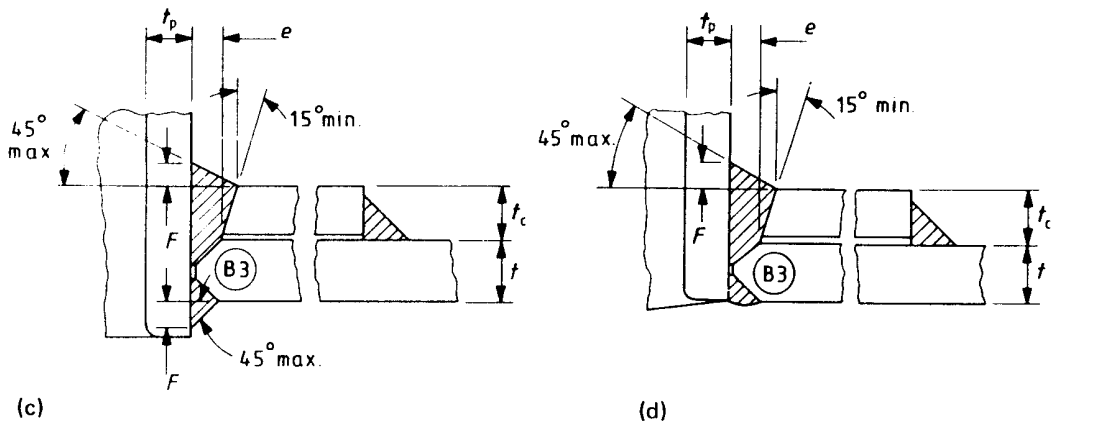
Typical weld details for connection of mountings: set-through type (alternative details) (See Figure 22 for recognized weld details.)
